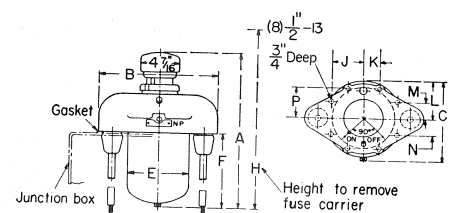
Cutout for metal enclosed assembly Model 9F2F38
